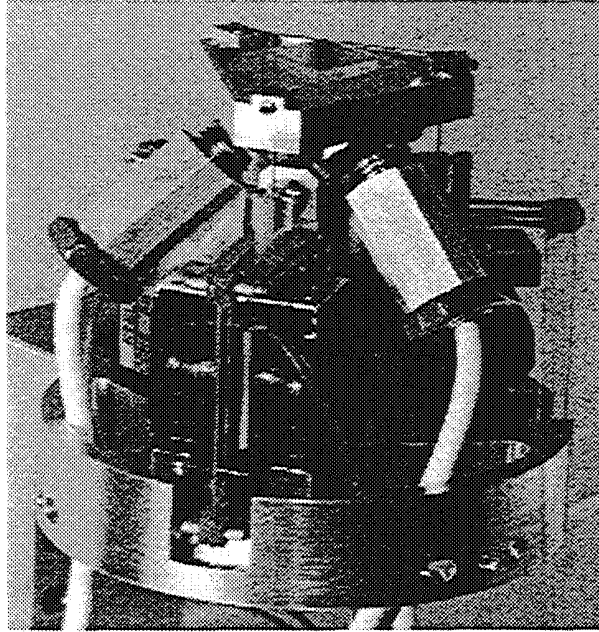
Photograph of two-axis tilt fine-pointing assembly prototype
